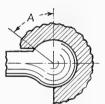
Toggle or pawl joint. Angle A should be 30 to 45 deg. to retain the member.
